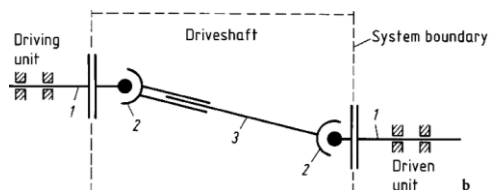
Scheme of Cardan shaft elements: 1 - connecting shaft, 2 - joints and 3 - intermediate shaft
